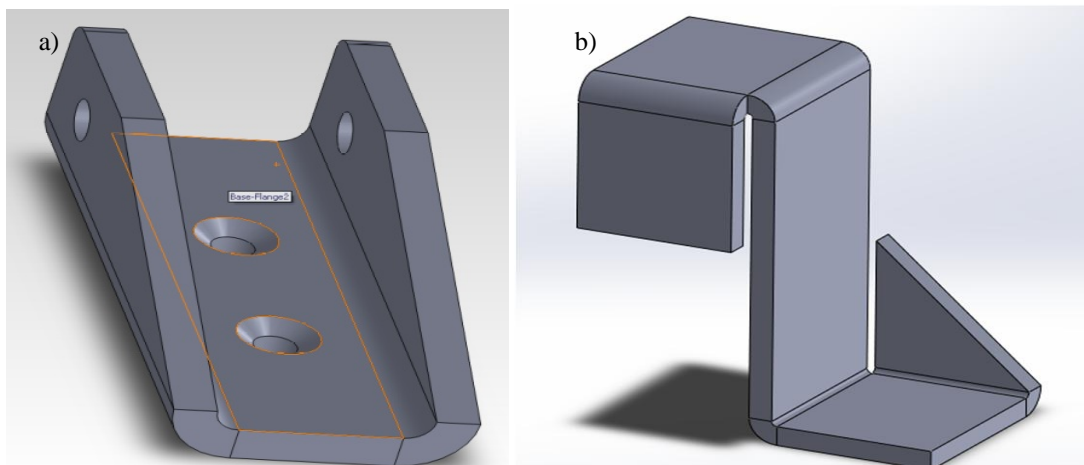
Module Three a) in-class sheet metal part and b) homework sheet metal part.
